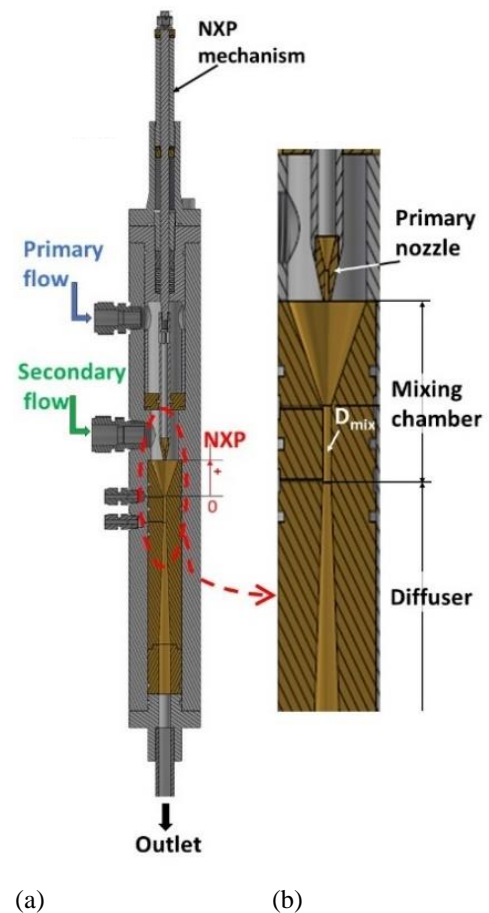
Tested ejector: (a) cross-section view (b) zoom on the mixing chamber
